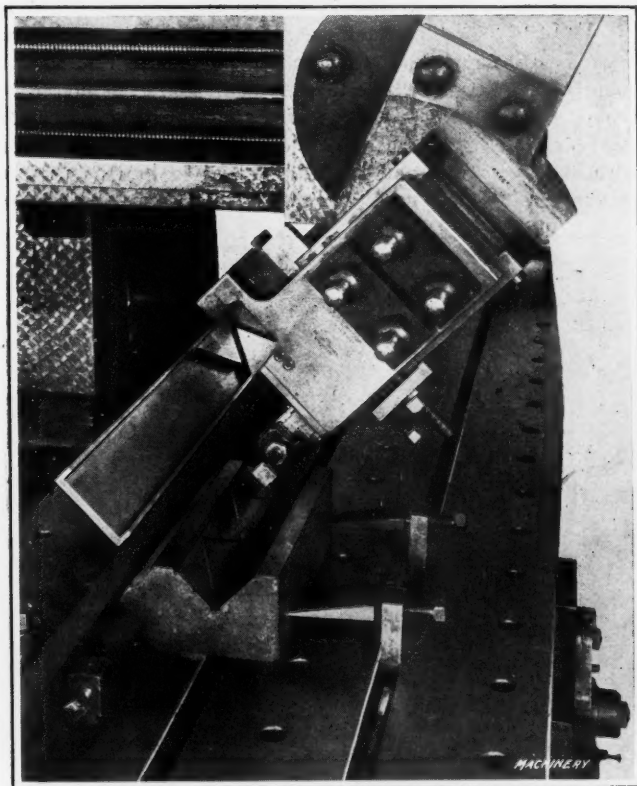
Hanson-Whitney Oil-grooving Attachment for Planers, cutting Oil-grooves in a Female V-bearing
